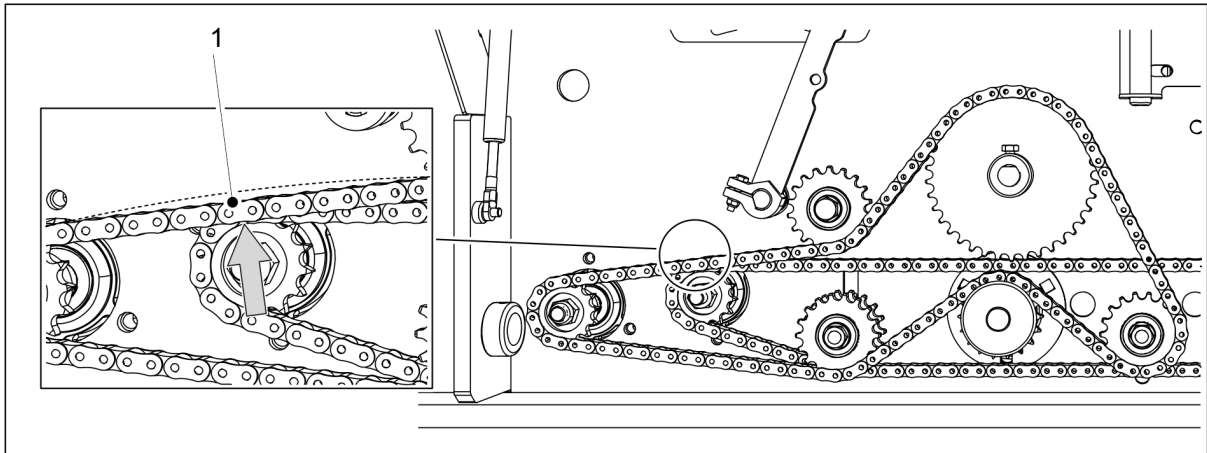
225. Checking chain tightness, fertiliser dispersing axle transmission
